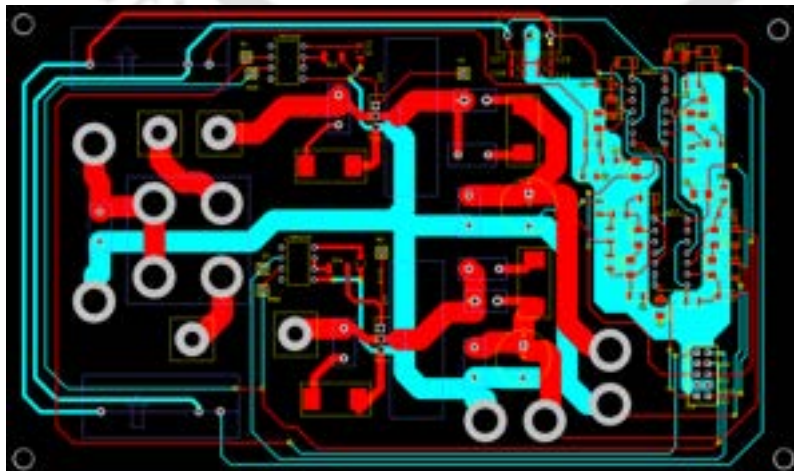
PCB design layout of CI-SIDO boost converter along with sensor circuit
